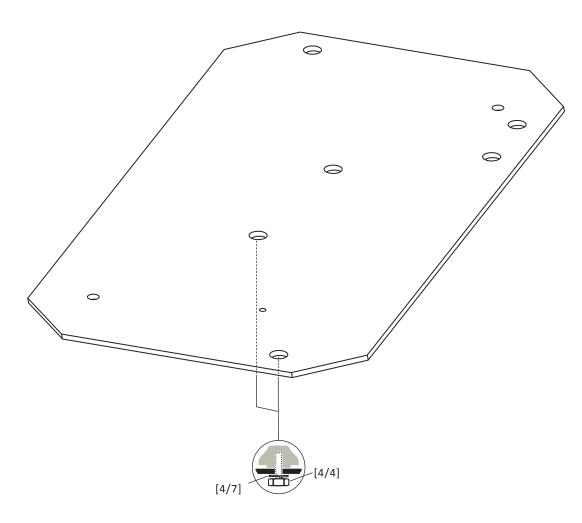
Meter-to-Mounting Plate Fixing Points (non-UHF)
